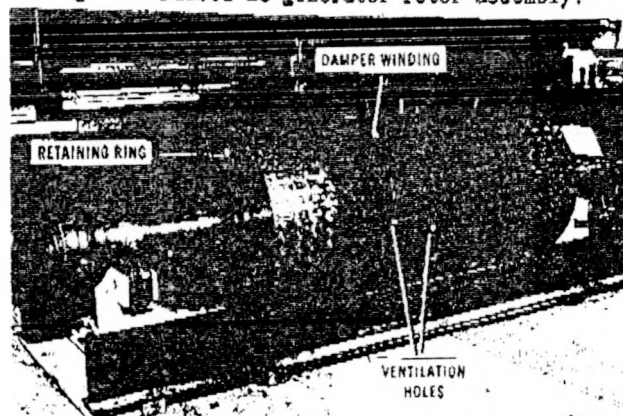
View of pulsed ac generator rotor showing damper winding construction.
